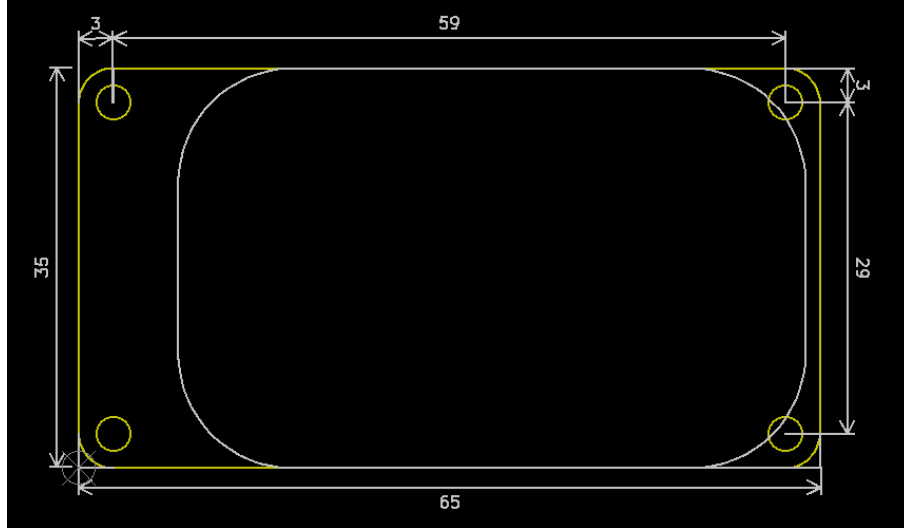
PocketBeagle and DTUSat-3 OBC board dimensions (in mm).
